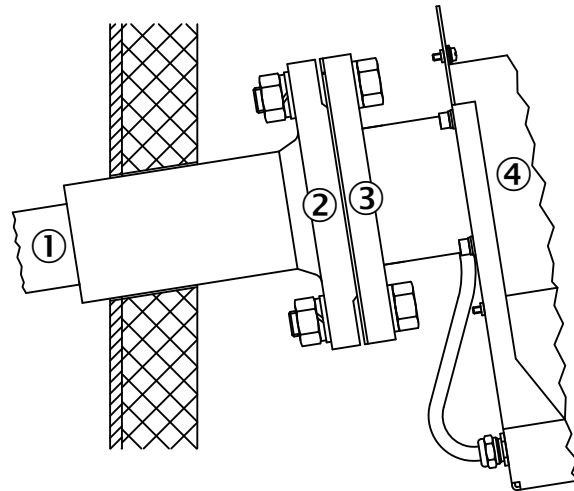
Installation of gas sampling tube on welding neck flange
